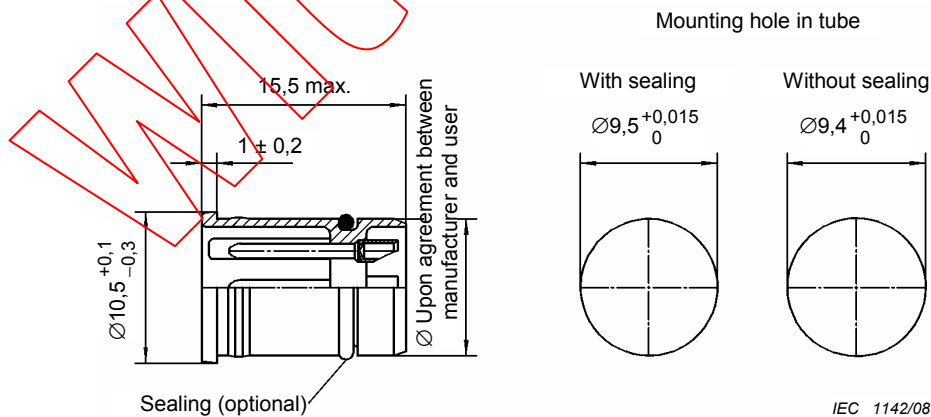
Tube insert, male contacts, mounting without thread (thread on tube)
